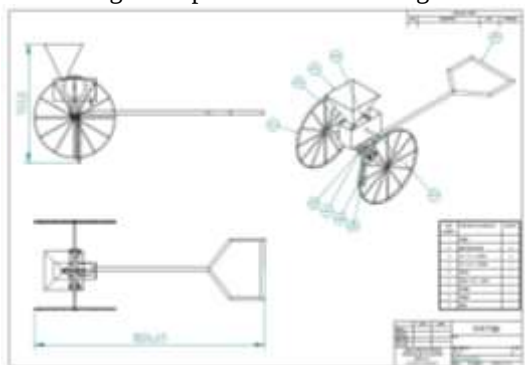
Orthographic and Isometric view of Seed Sowing Machine
